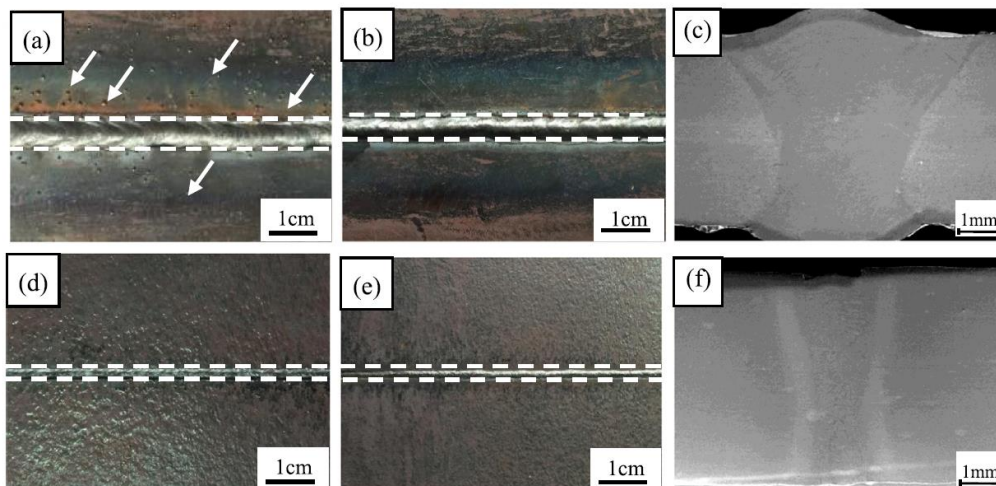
Bead appearances and macro-sections of welded joints (a) top bead of GMAW, (b) bottom bead of GMAW, (c) macro-section of GMAW, (d) top bead of LBW (e) bottom bead of LBW, (f) macro-section of LBW [11]
